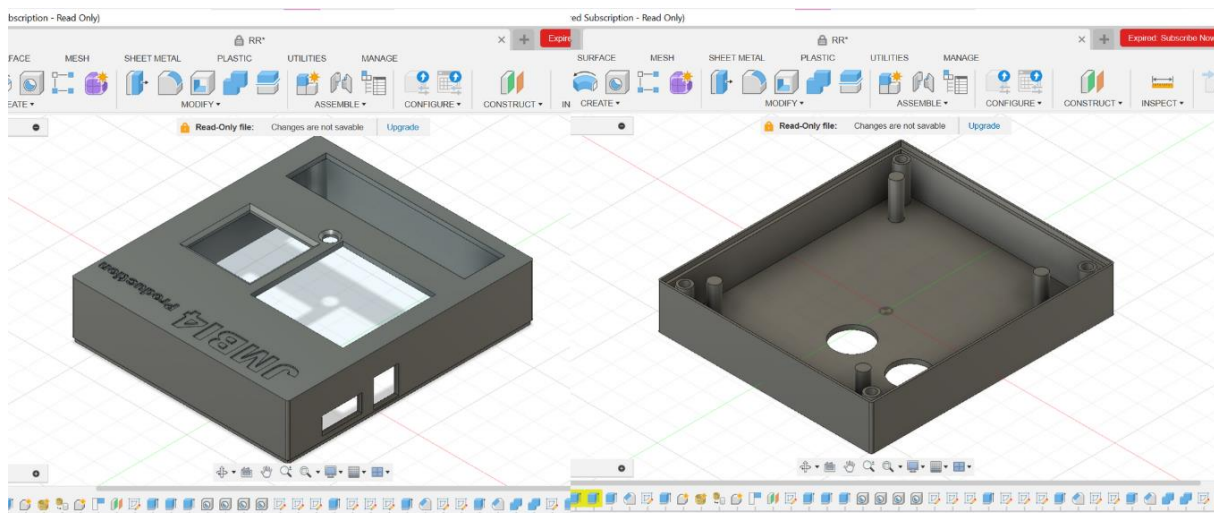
Designed enclosure parts (lid and base) prior to virtual assembly.
